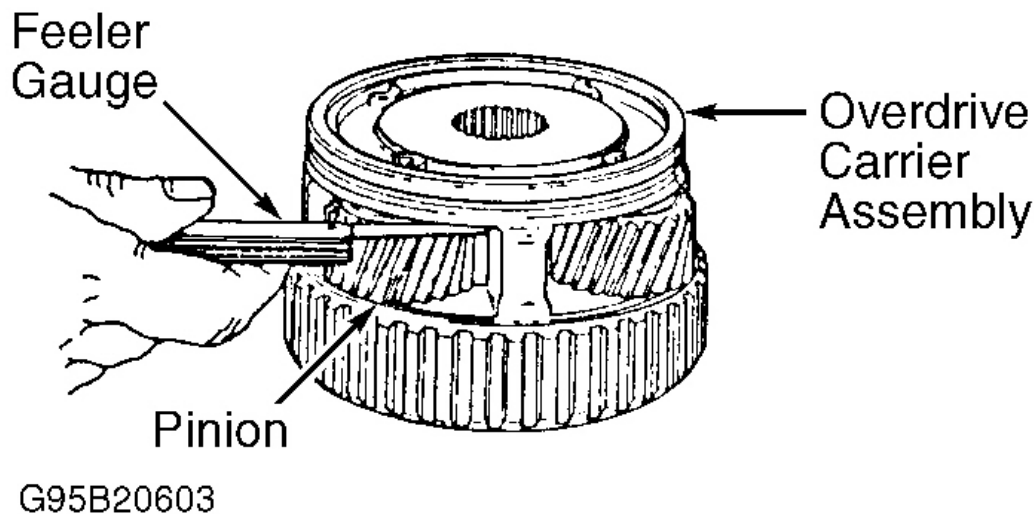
Measuring Overdrive Carrier Assembly Pinion End Clearance
